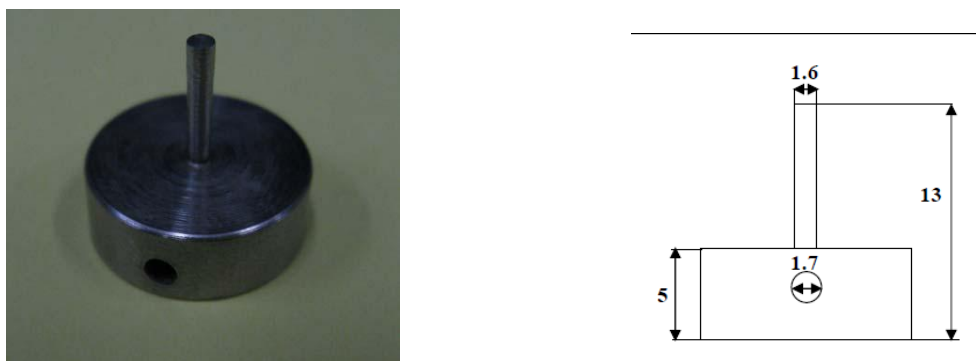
Machined working electrode of Alloy 900 (measurements in millimetres).
